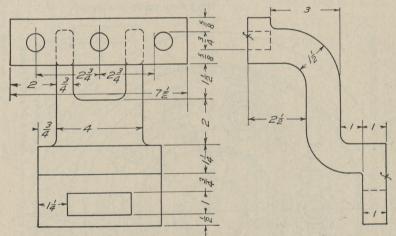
An incorrect drawing to be checked for errors (offset bracket).
